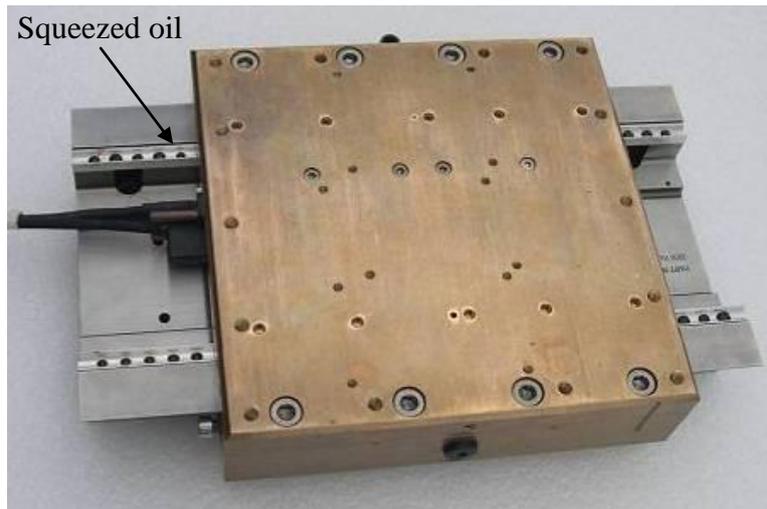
The aerostatic bearing slide fitted with squeezed oil film damper
